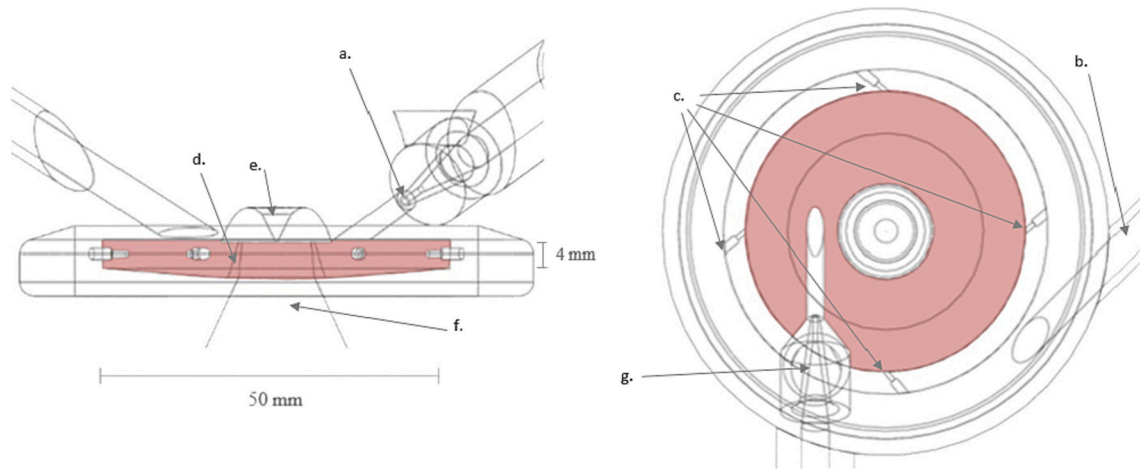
An in-house made CAD drawing of Hosokawa Micron AS-50 mill. (a) feed gas nozzle, (b) grinding gas feed, (c) grinding gas nozzles, (d) classifier ring, (e) vortex finder, (f) mill exit pipe & (g) hopper section for solid feeding.
